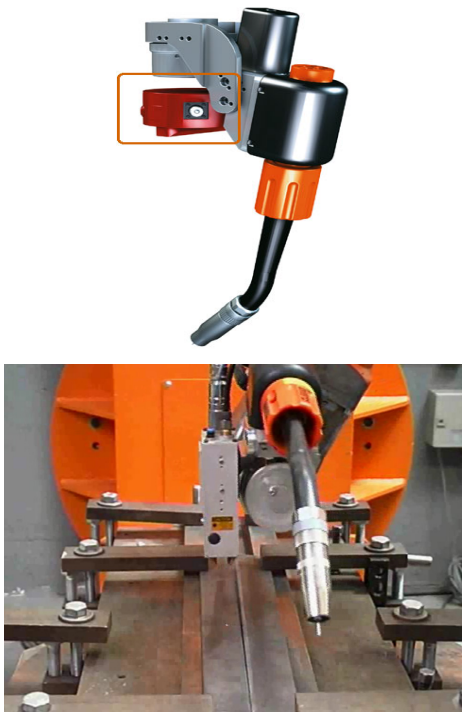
Searching for the starting point of the weld seam by offline laser sensor
